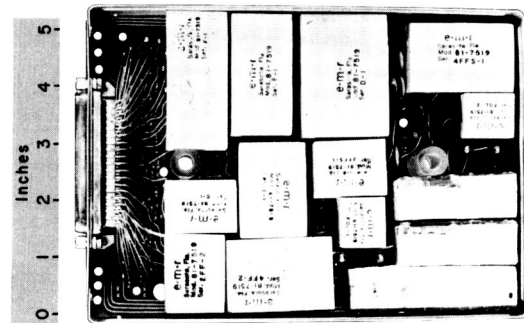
Printed circuit card, mounting encapsulated modules.
